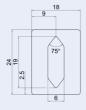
Schematic drawing of adhesive tape gasket for Fluidic 1004 - straight rhombic shape
